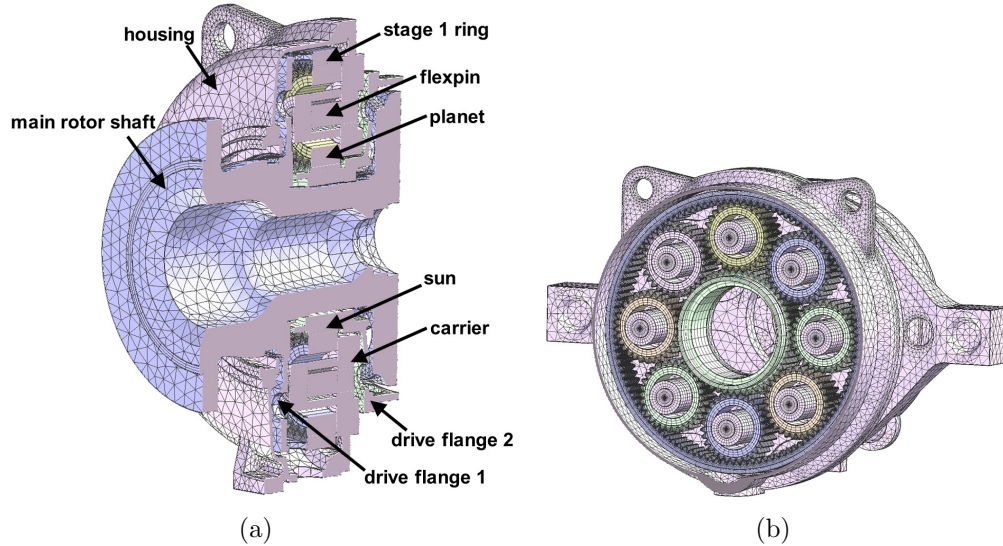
(a) Cutaway view of the finite element model of stage 1 on the FC5500, and (b) view of stage 1 from the front of the gear train.
